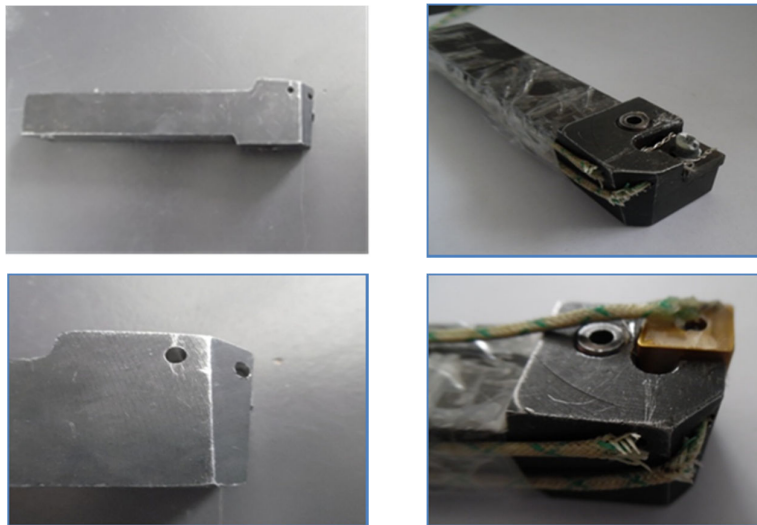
The mount mode of the thermocouples on the cutting tool.
